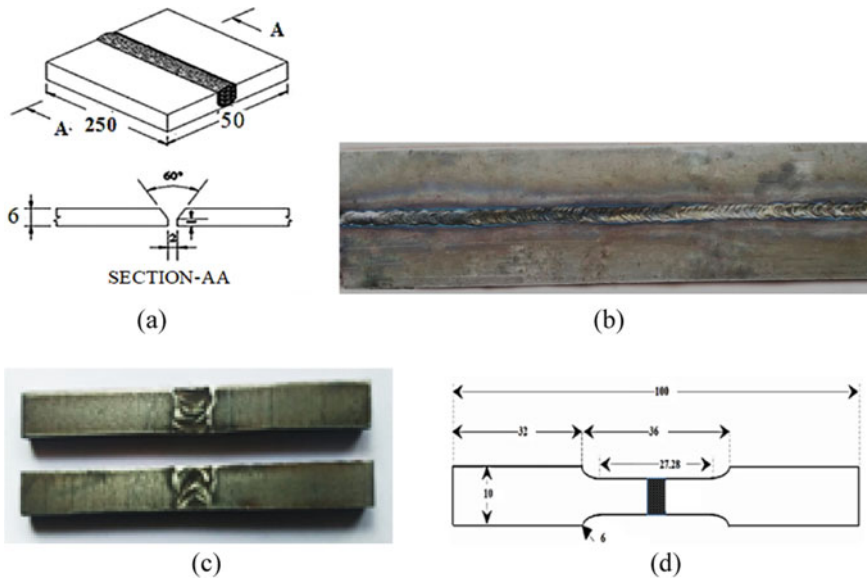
a Schematic sketch of the TIG welded plate (in mm), b FSS plate ($250 \times 50 \times 6 \text{ mm}^3$) was TIG welded using argon gas and ER409Nb filler wire, c TIG welded tensile pieces, d tensile test sample as per ASTM E8-sub size standard
